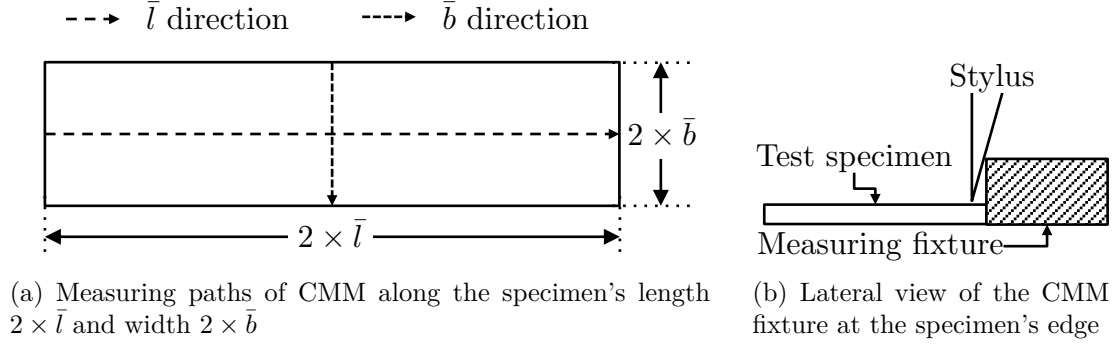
Measuring path and CMM fixture diagram of test specimens
